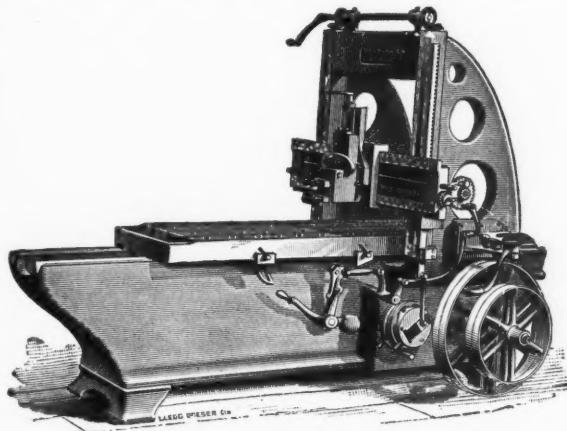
G. A. Gray Planer, illustrating Modern Type.
